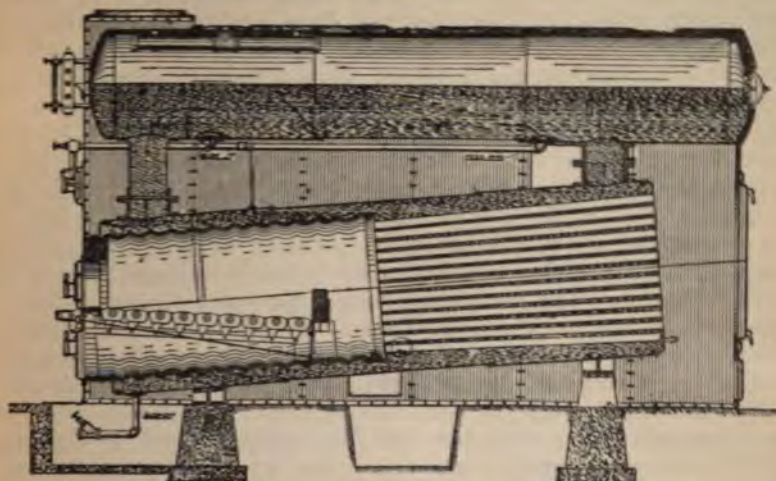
Sectional View of Robb-Mumford Standard Boiler.
